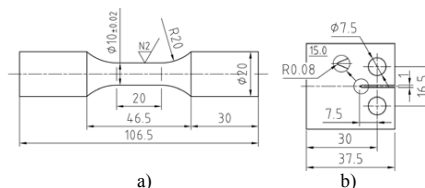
Shape and dimensions of specimens: a) cylindrical specimen for monotonic and cyclic testing and b) CT specimen.
